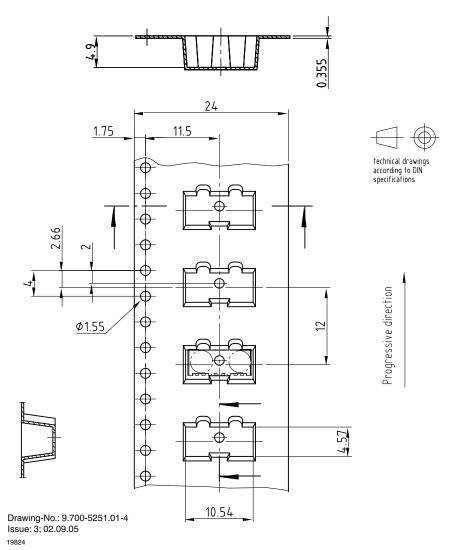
Tape Drawing, TFDU4101 for Top View Mounting, Tolerance  $\pm$  0.1 mm
